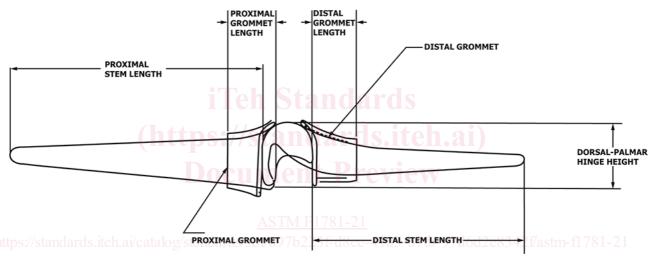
Dimensions of Finger Joint Replacement Implant with Grommets
